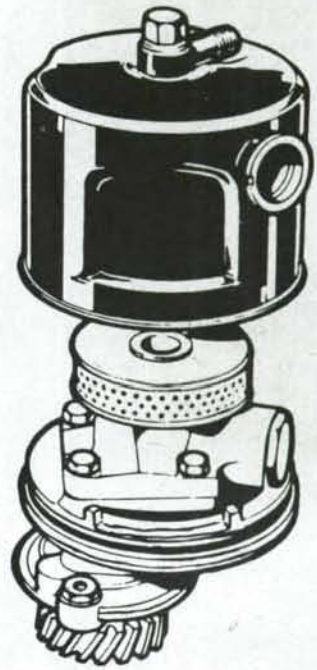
When installing reservoir, align indent in reservoir with positioning lugs on pump body as shown.
